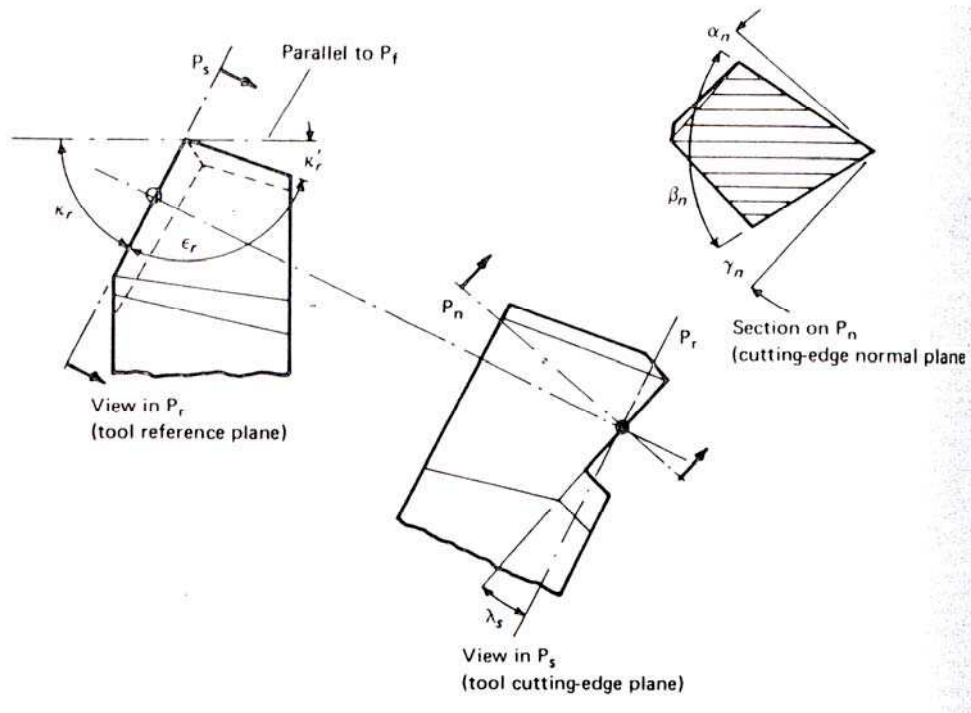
Tool angles for a single-point tool according to the ISO: tool cutting edge angle (k_r), tool minor cutting edge angle (k'_r), tool included angle (ϵ_r), tool cutting edge inclination angle (λ_s), tool normal rake angle (γ_n), tool normal clearance angle (α_n) and tool normal wedge angle (β_n) (BOOTHROYD; KNIGHT, 1989).
